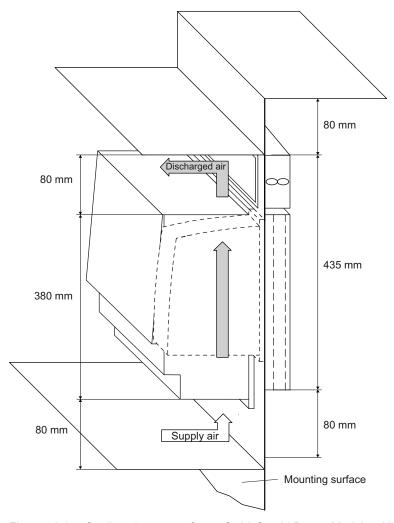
Cooling clearances for an S120 Combi Power Module with expansion axis
